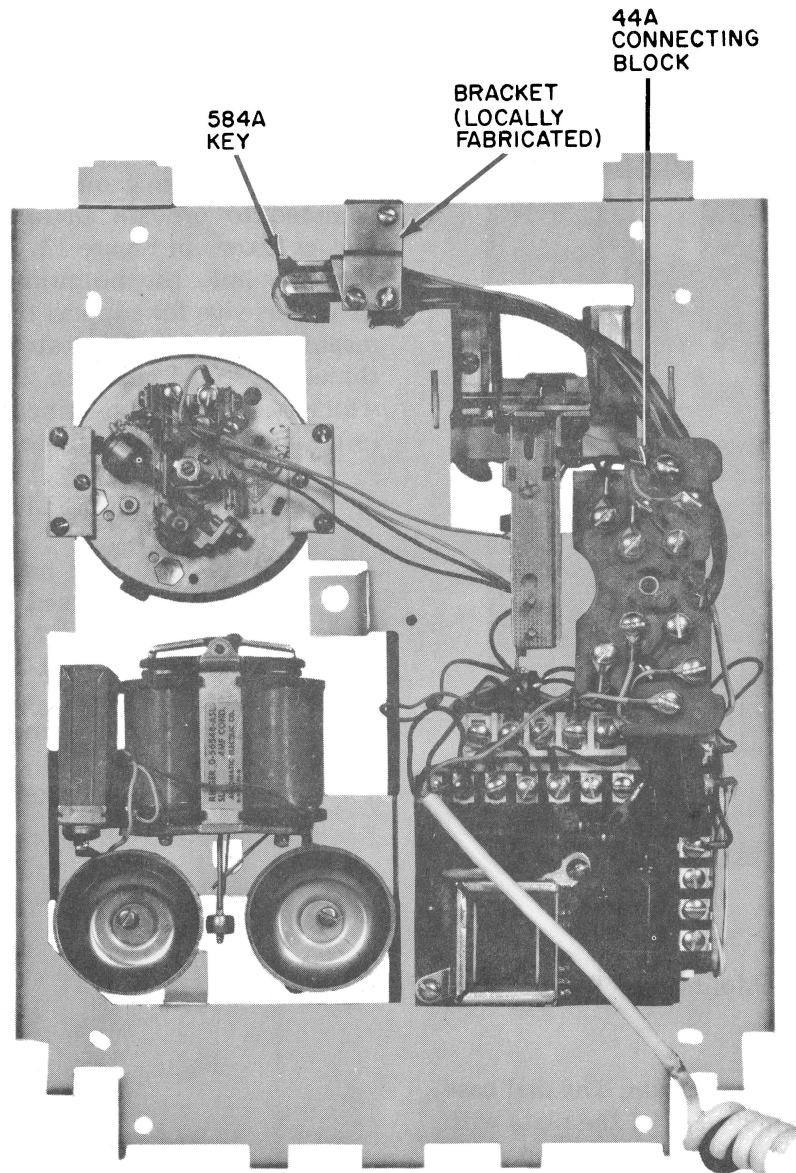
Component Mounting Plate, Showing Locally Mounted Turn Key and Connecting Block.
